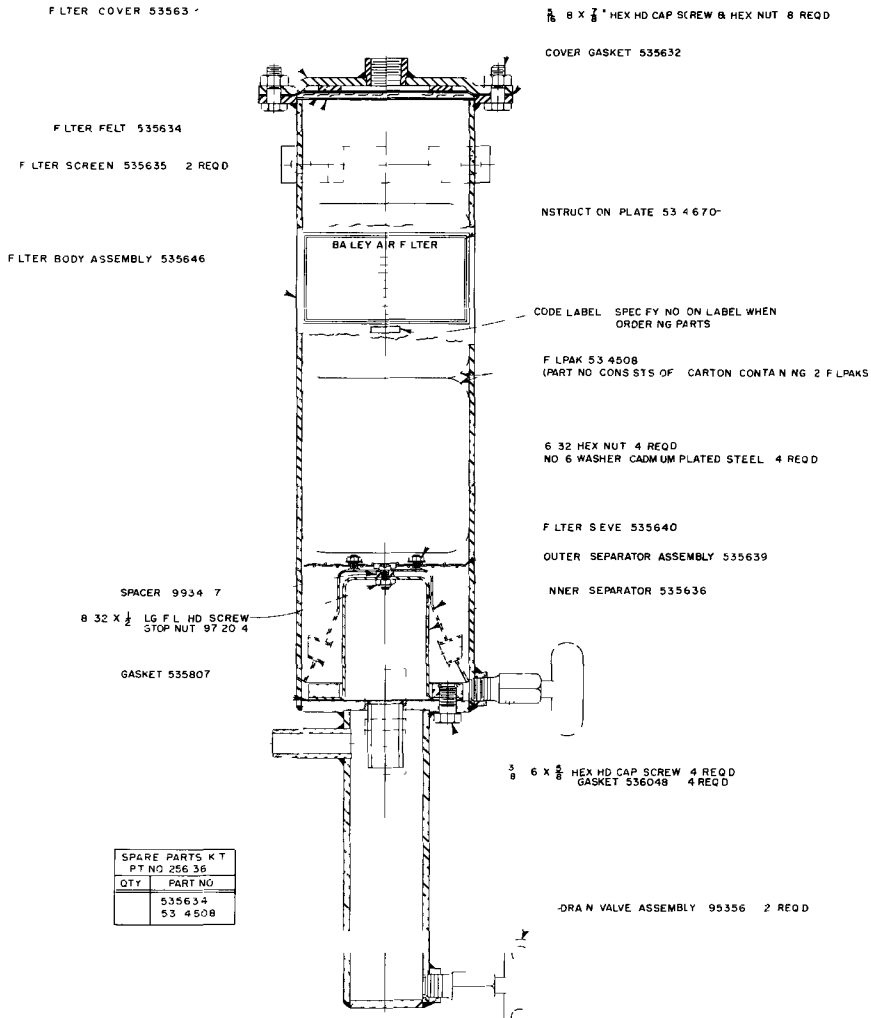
Parts Drawing P956, Air Filter, 6cfm Capacity, Part Number 5357151
